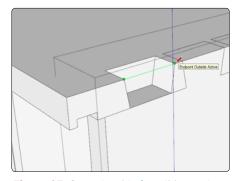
Move the top component and delete the extra lines to open the dovetail.
